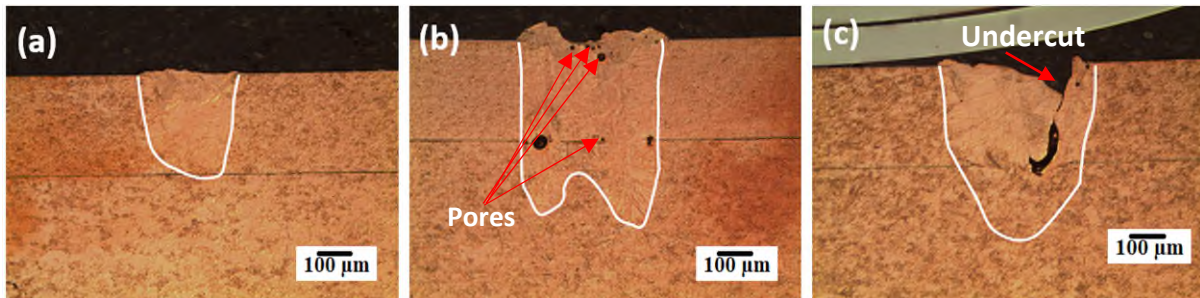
Macro view of the laser-welded Cu[Ni] tab to Cu busbar at (a) under-weld, P= 525 W (b) good-weld, P= 975 W and (c) over-weld, P= 1275 W
